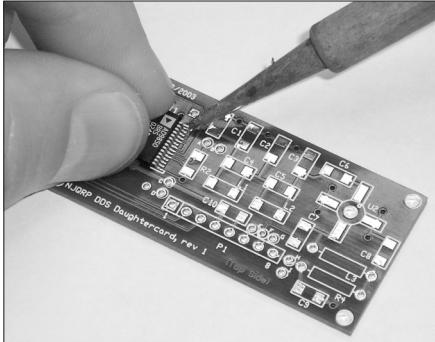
A — This DDS Daughtercard has all interconnections on the top side. Connections to the ground plane on the backside of the board are made by the use of “vias,” wires through the PC board. Pin 28 of the SMT IC is shown being tack-soldered to hold it to the board, keeping all other pins carefully aligned on their pads. Then the other pins are carefully soldered, starting with pin 14 (opposite pin 28). Finally, pin 28 is reheated to ensure a good connection there. If you bridge solder across adjacent pads or pins, use solder wick or a vacuum solder sucker to draw off the excess solder.
